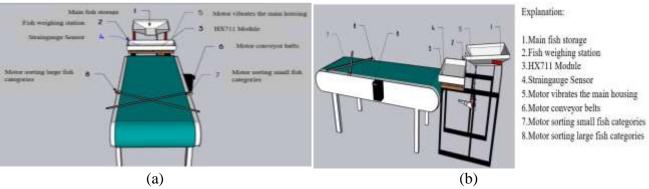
Dimensions of the Tool, as seen (a) from the front (b) from the side
